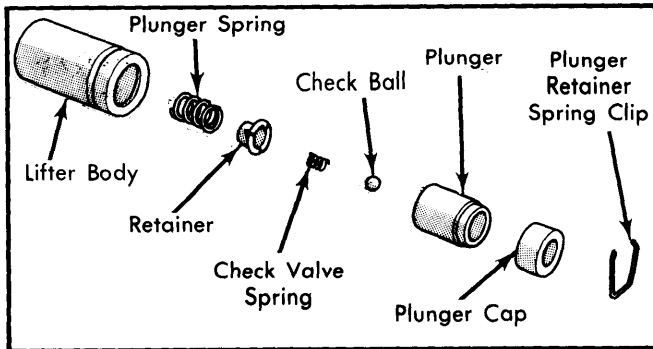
Exploded View of Hydraulic Lifter Assembly
